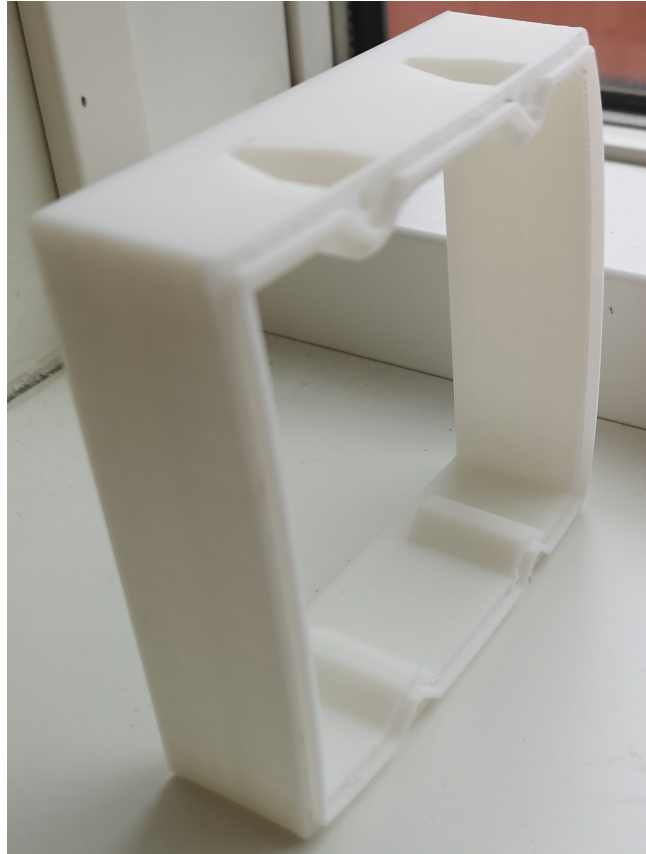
First 3D-printed prototype with tracks, male part B1.
